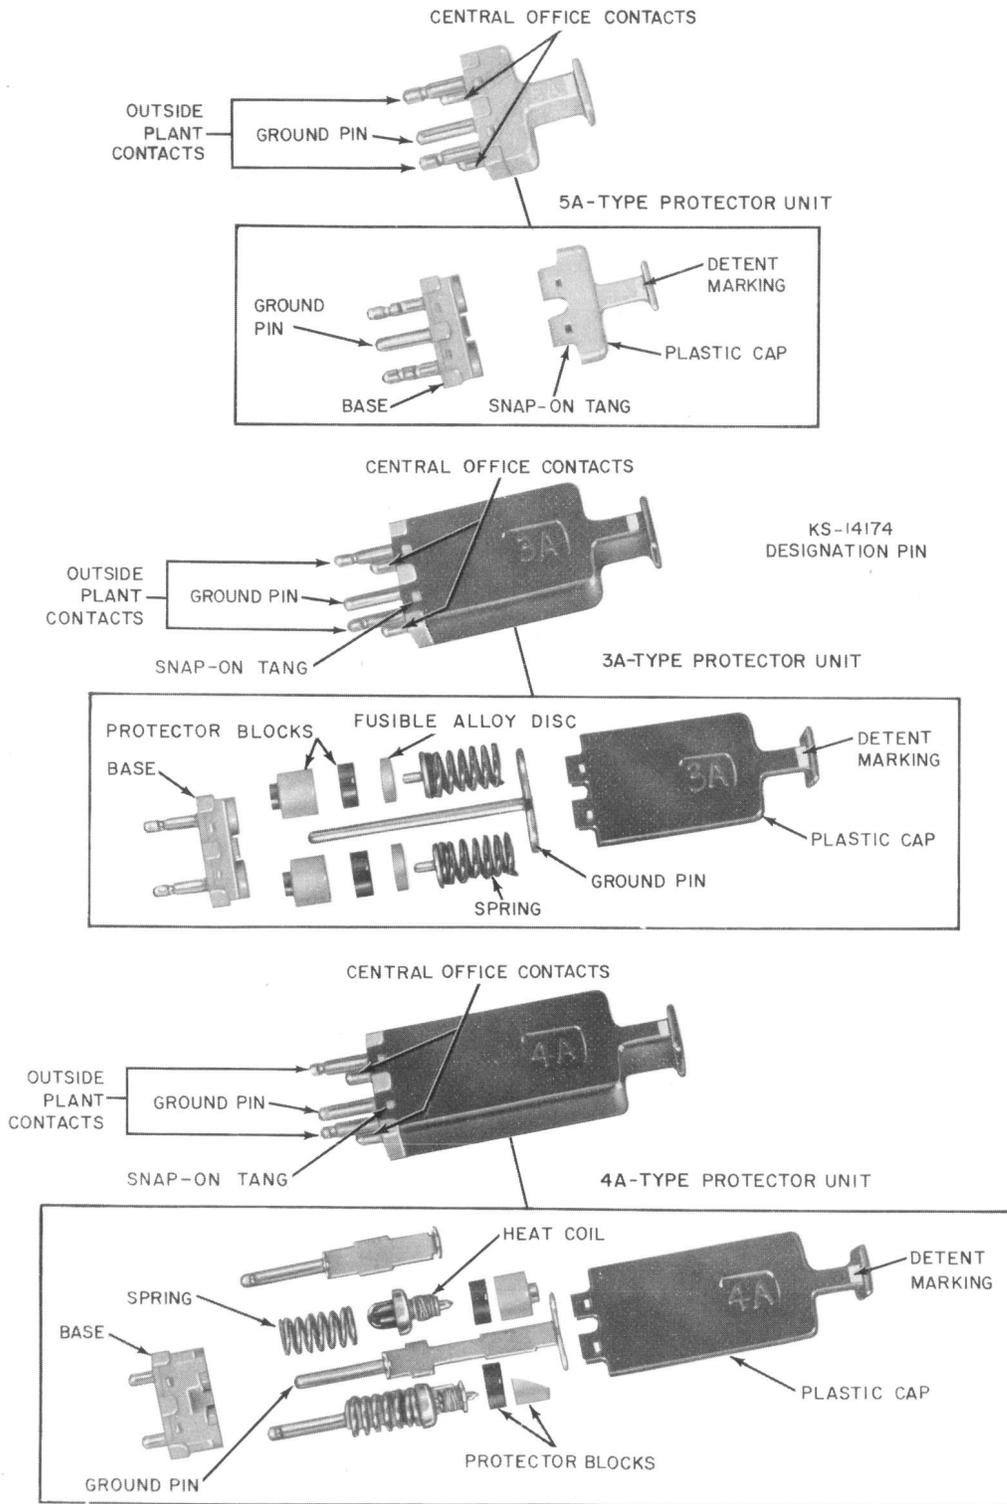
Protector Units and Designation Pin (for Gold-Plated Terminal, 302-Type Connectors)
